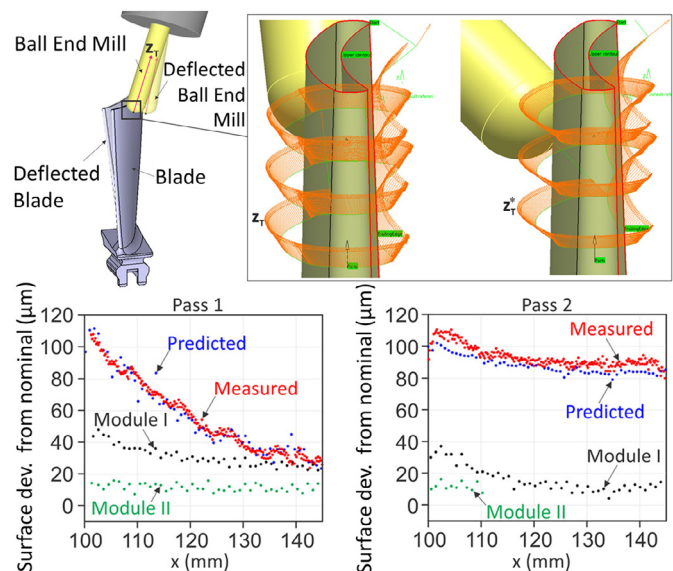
Top left: representation of the machining process; top right: initial tool path and tool orientation optimized tool path; bottom: comparison of surface errors, blue – predicted for nominal NC code, red – measured for nominal NC code, black – measured for the modified NC code using tool orientation modification (module I), green – predicted for the modified NC code using tool position modification (module II) [111].
